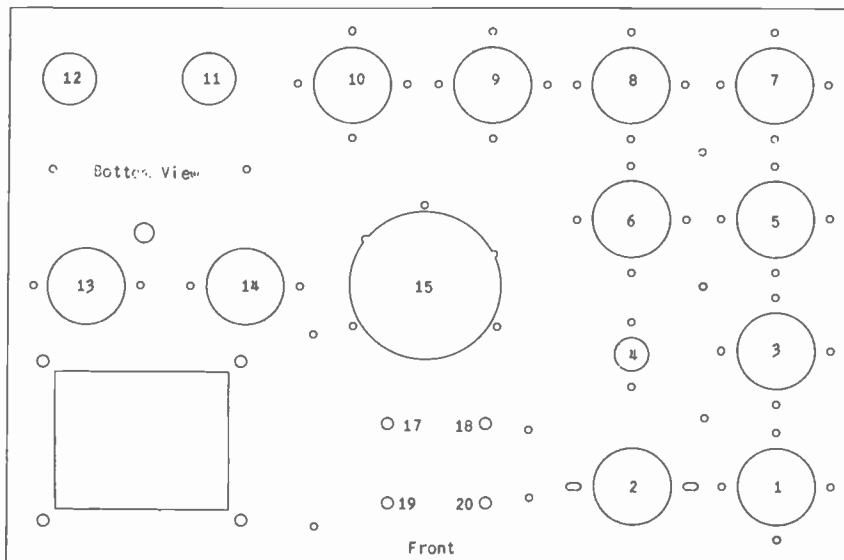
A bottom view of your metal chassis showing mounting holes.
